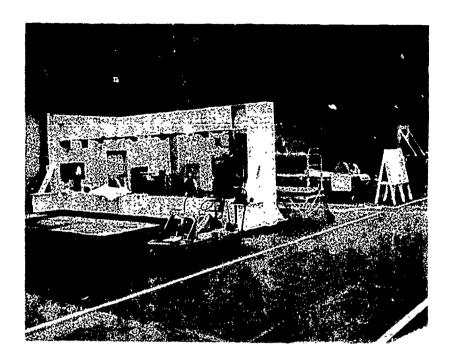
WCTS FINAL ASSEMBLY AREA
